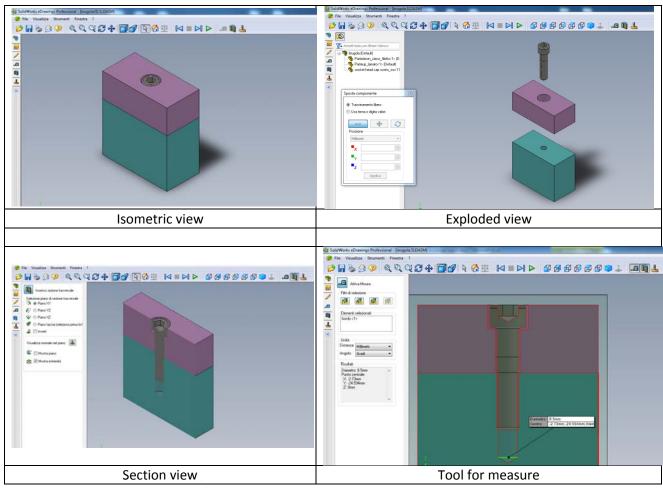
3D interactive thread fastener with a Socket Head Screw
